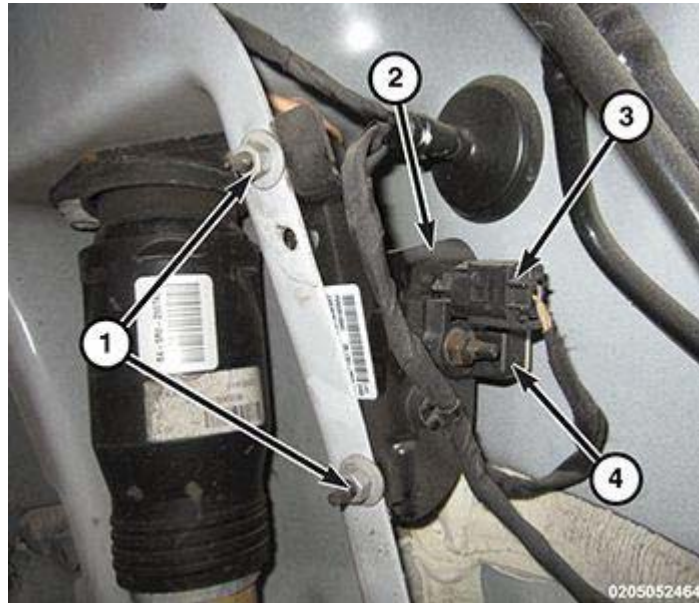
Rear ADS Sensor Nuts, Connector & Sensor
